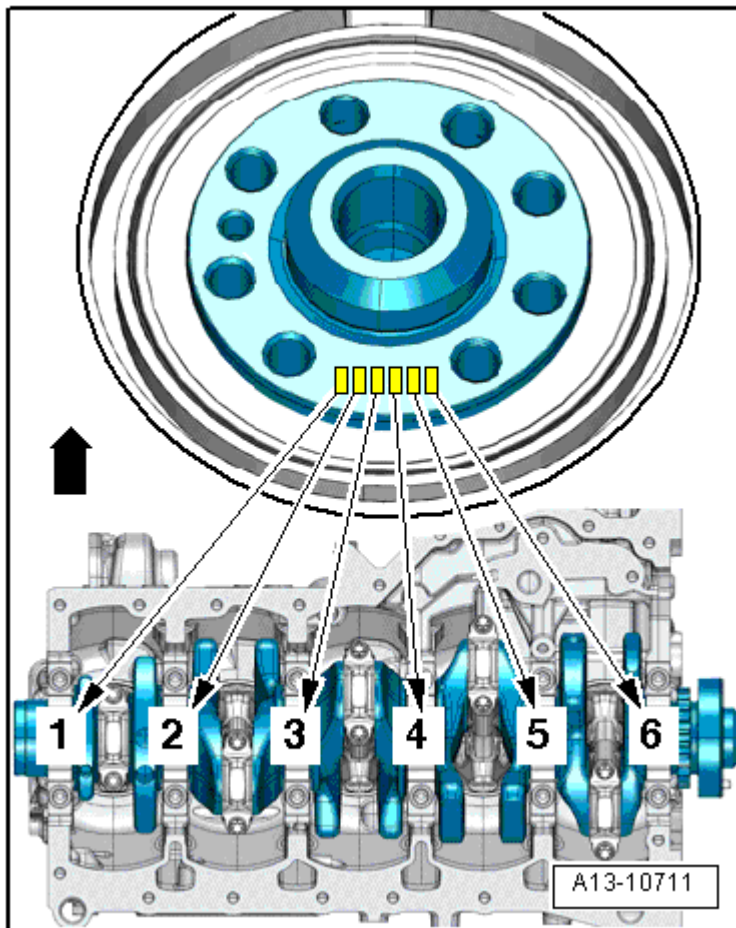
Allocation, Lower Bearing Shells (Bearing Cap)
